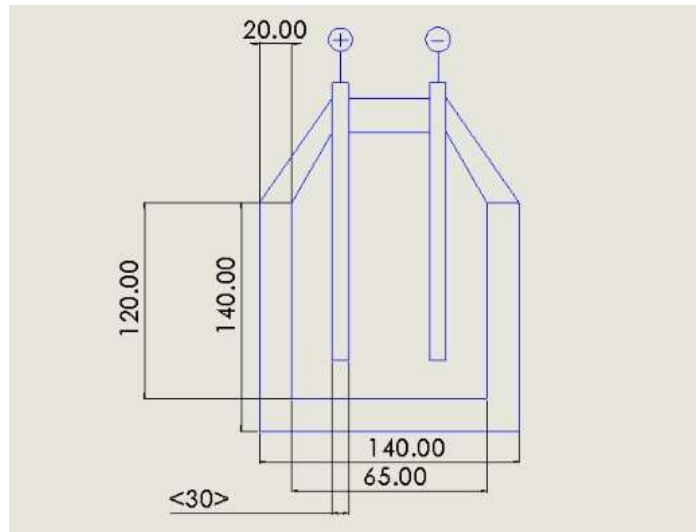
Technical drawing of the furnace used for experiments (dimensions in mm)
